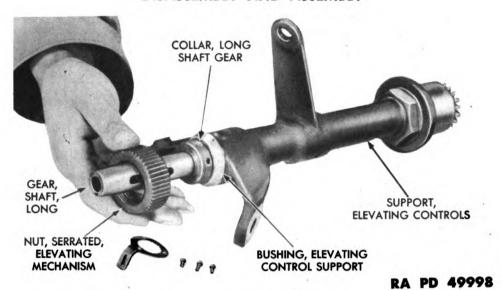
Removing the Elevating Mechanism Serrated Nut
